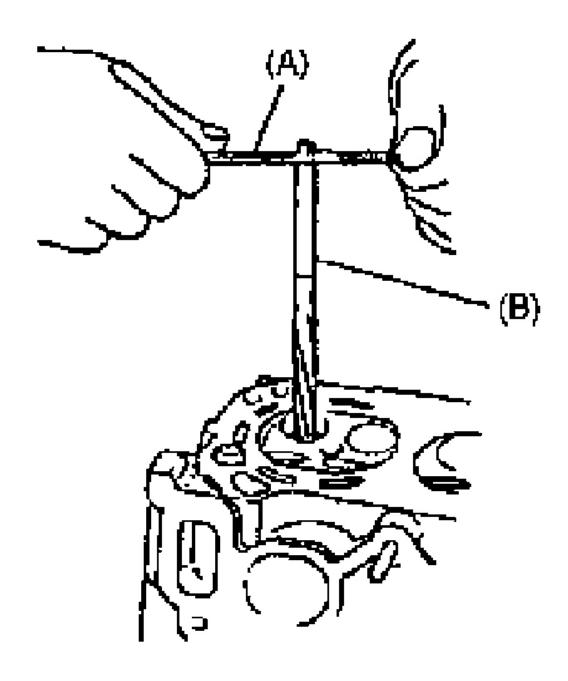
Reaming Guide Hole Into Cylinder Head Courtesy of SUZUKI OF AMERICA CORP.
